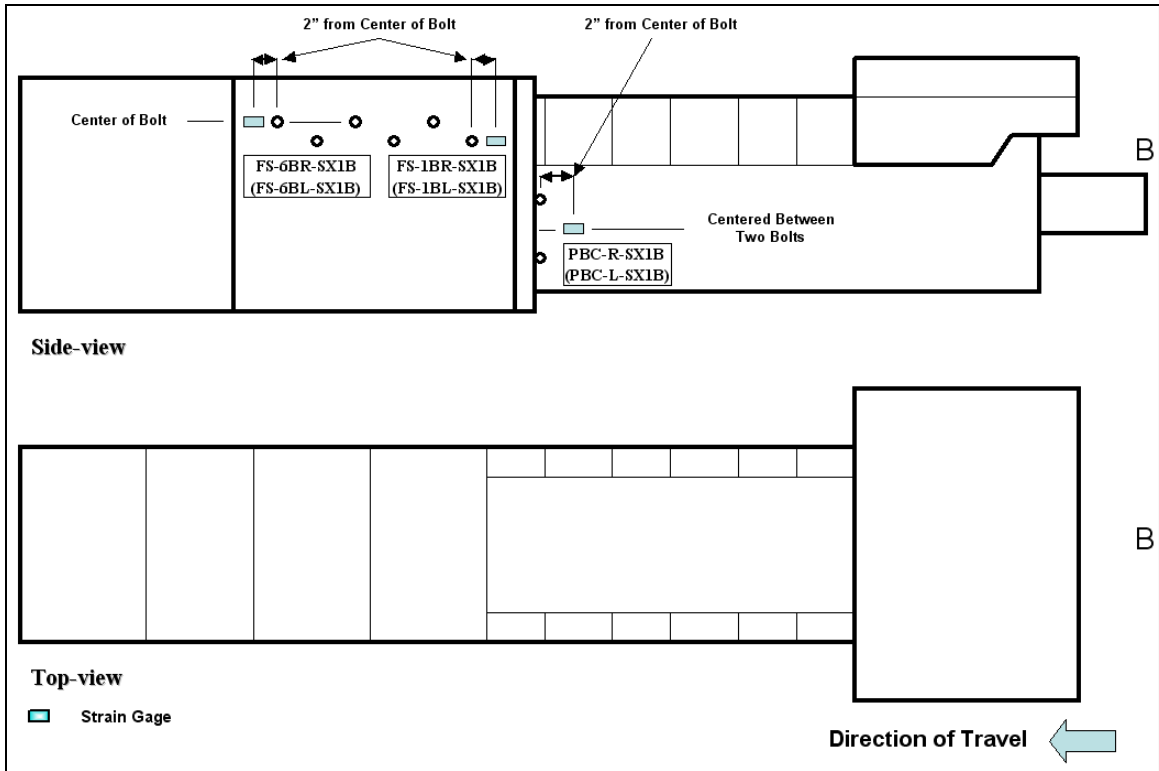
Strain Gauge Layout on Car 248 (Trailing) End Fixed/Sliding Sill
